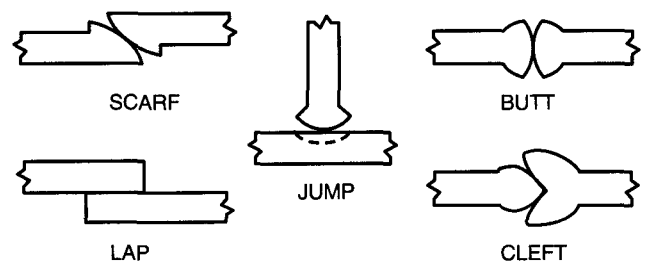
Typical Joint Designs Used for Manual Forge Welding
